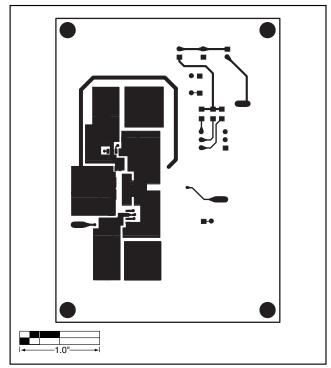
MAX1715 EV Kit PC Board Layout—Component Side
